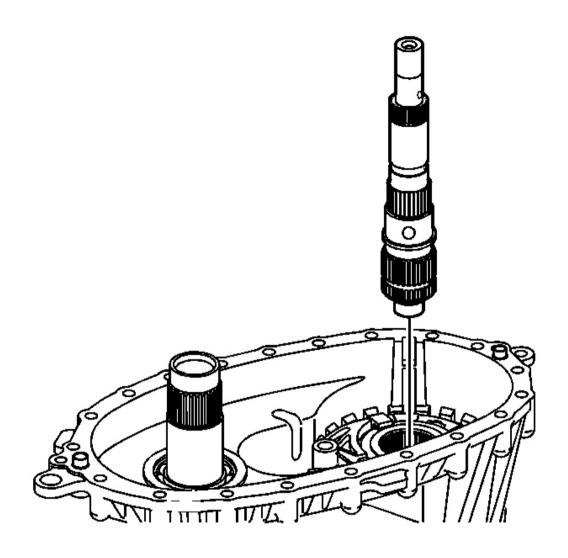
Identifying Mainshaft Courtesy of GENERAL MOTORS CORP.
